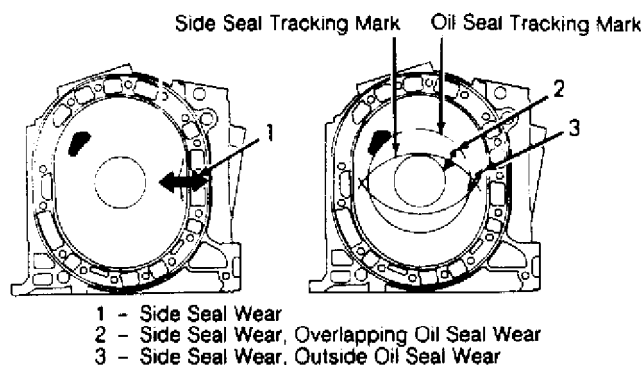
Checking Oil Seal & Side Seal Step Wear
